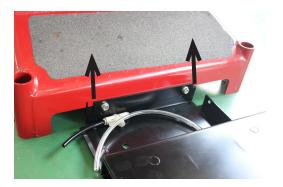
Loosen the bolts and move BACK PLATE upward against the chassis edge, then tighten them.
